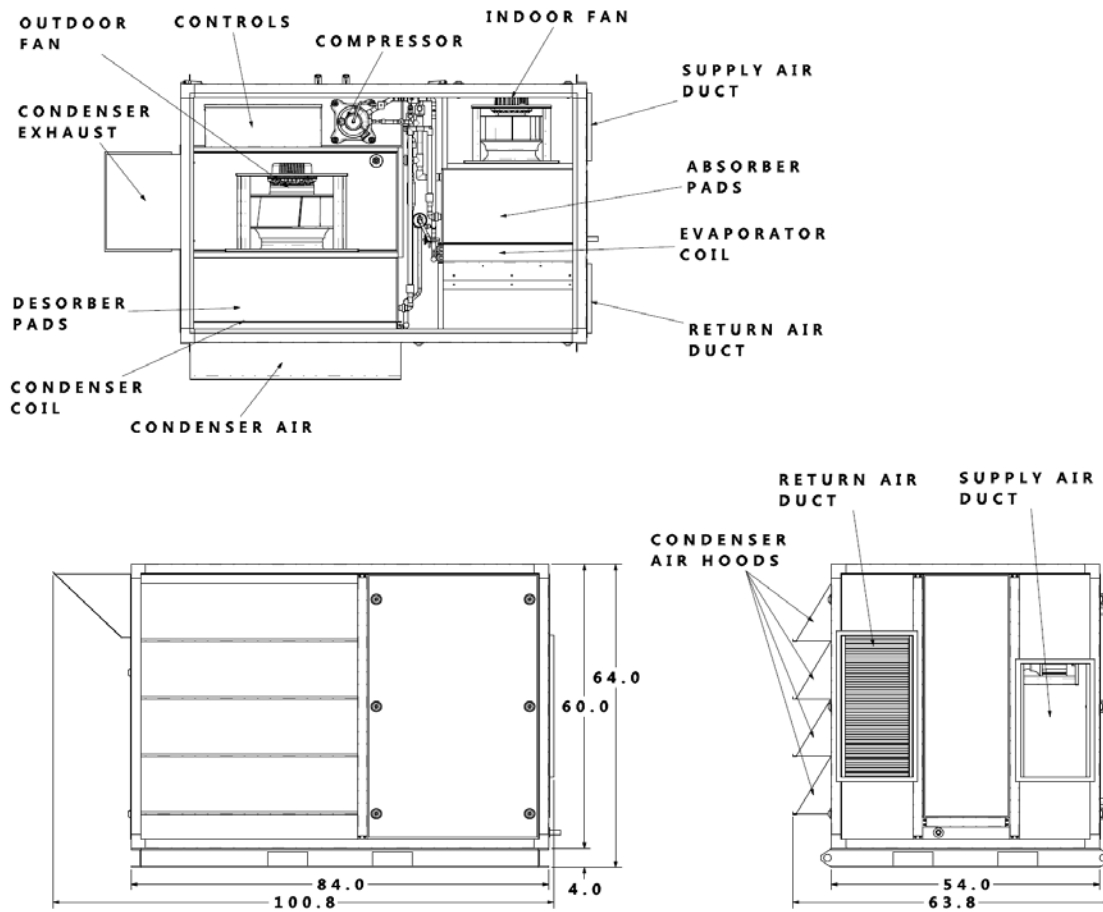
Engineering Drawing of the LDDX-Ad Prototype (84" L x 54" W x 64" H)
